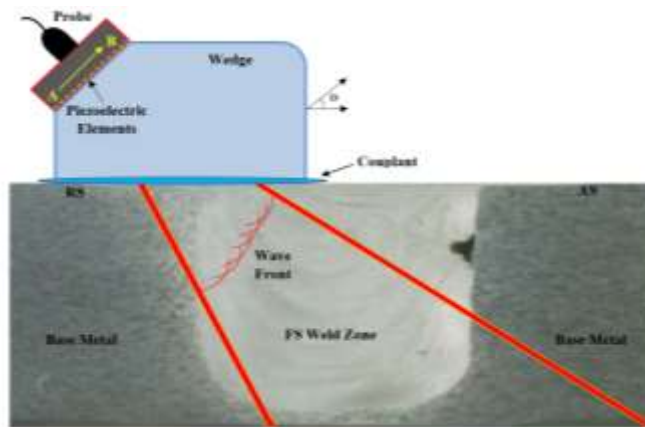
A typical probe and wedge configuration with illustration of wave propagation inside a FS welded specimen.
